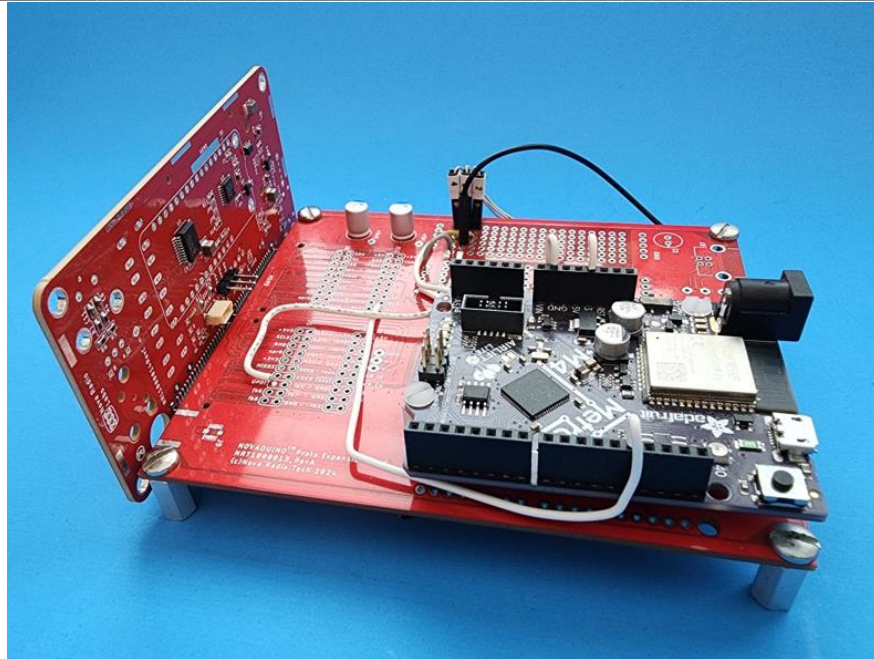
Mounting method 4 using a Novaduino® Prototype Expansion Card with a processor
